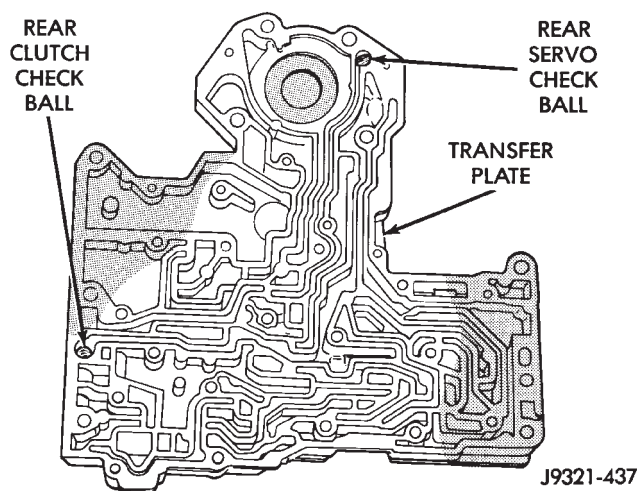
Rear Clutch And Rear Servo Check Ball Locations
